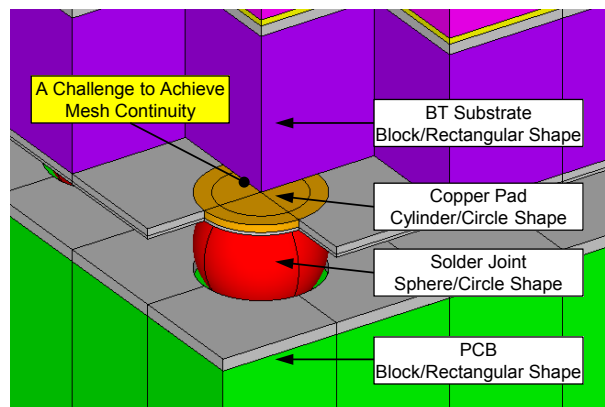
Geometrical Configuration of Example PBGA Package Assembly
